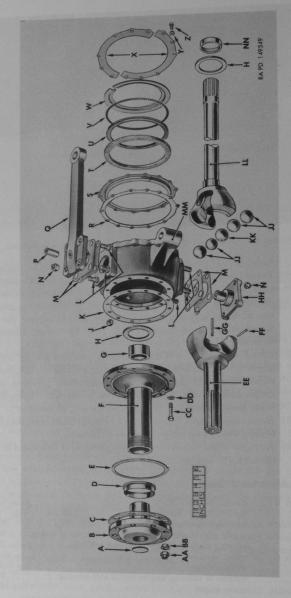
Components of steering knuckle, support, oil seals, and universal joint (left side shown).
